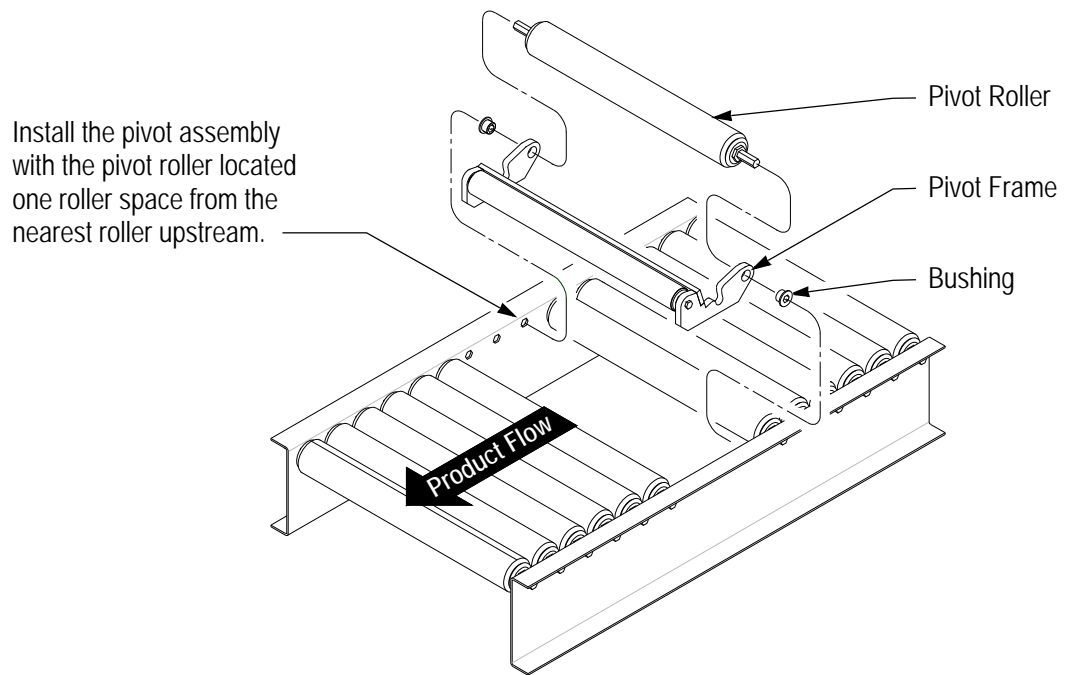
Install The Pivot Assembly – 2" & 4" Roller Centers
